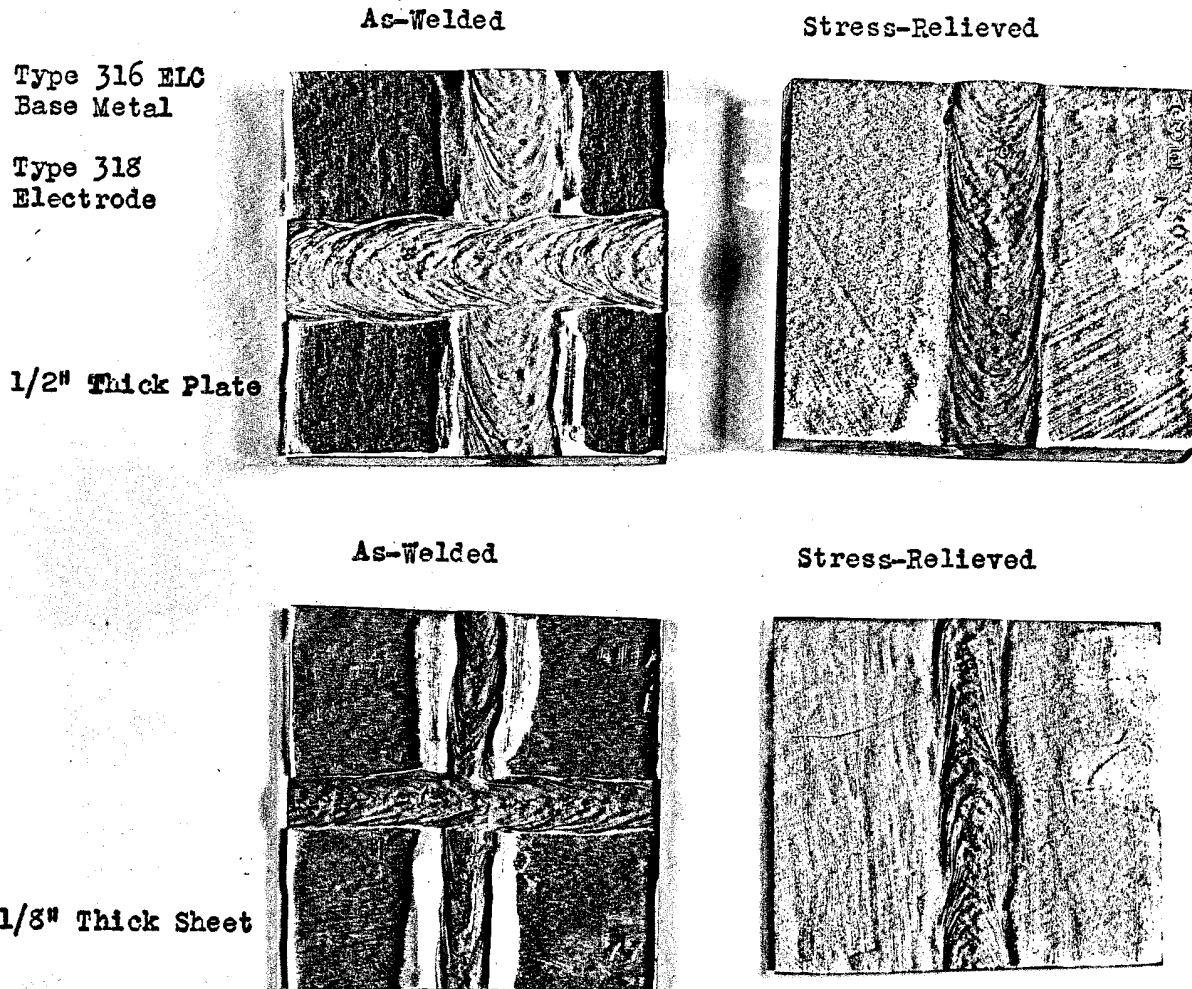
Appearance of Nitric-Hydrofluoric Acid Etch Test Specimens. Type 316 ELC Base Metal Welded with Type 318 Electrodes. Full Size.
